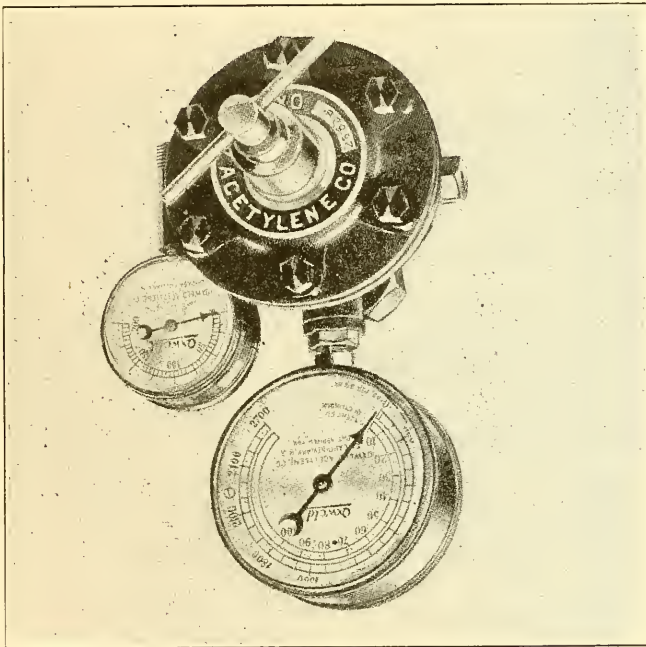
Oxweld Oxygen Cutting Regulator.
